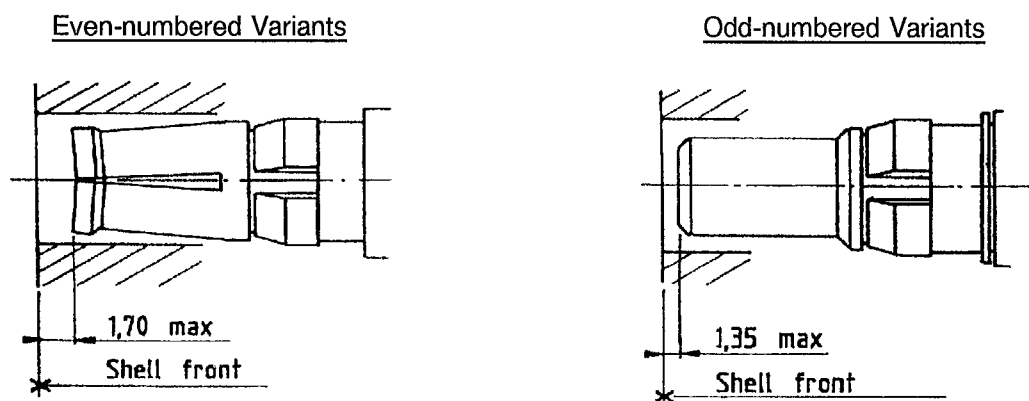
PHYSICAL DIMENSIONS (Continued)
